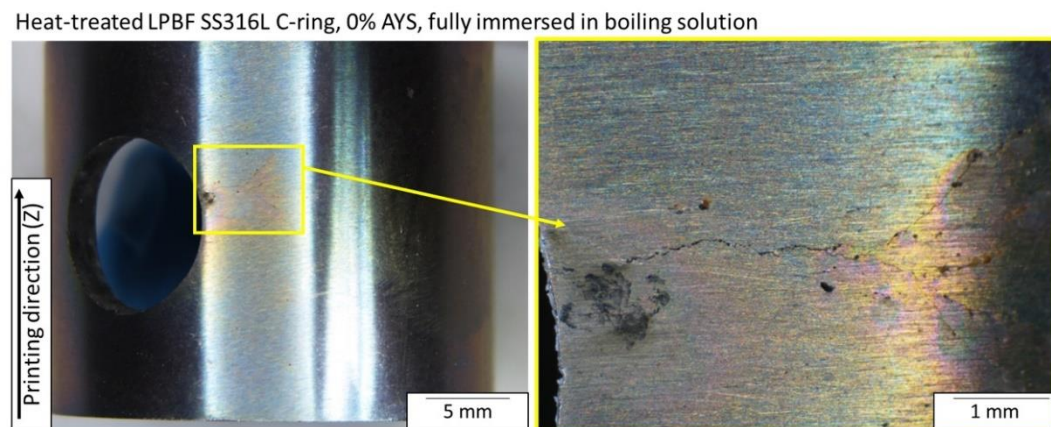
Photographs of an unstressed (0% AYS) stress-relieved LPBF SS316L C-ring after full immersion in boiling solution showing identical SCC morphology and crack location as its as-printed counterparts
